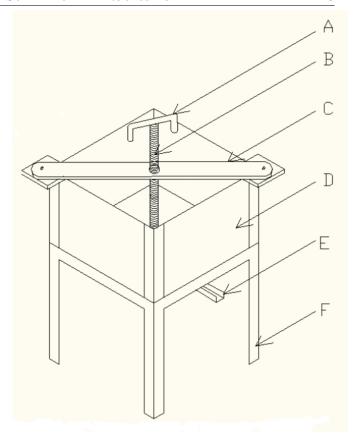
Isometric projection of screw press. (A = Turning bar; B = Threaded pressing shaft; C = Flat iron bar; D = Pressing chamber; E = Discharge outlet; F = Frame.)
